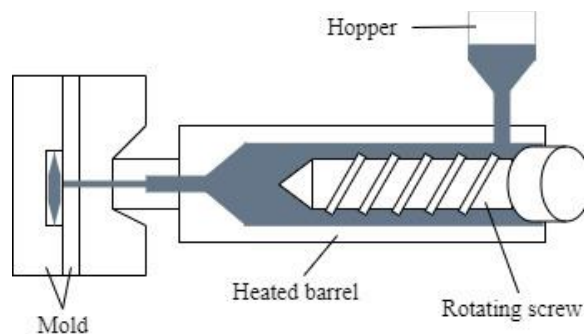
A sketch of a reciprocating screw injection molding machine
